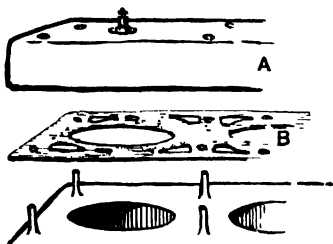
Cylinders, cylinder head gasket and cylinder-head.
